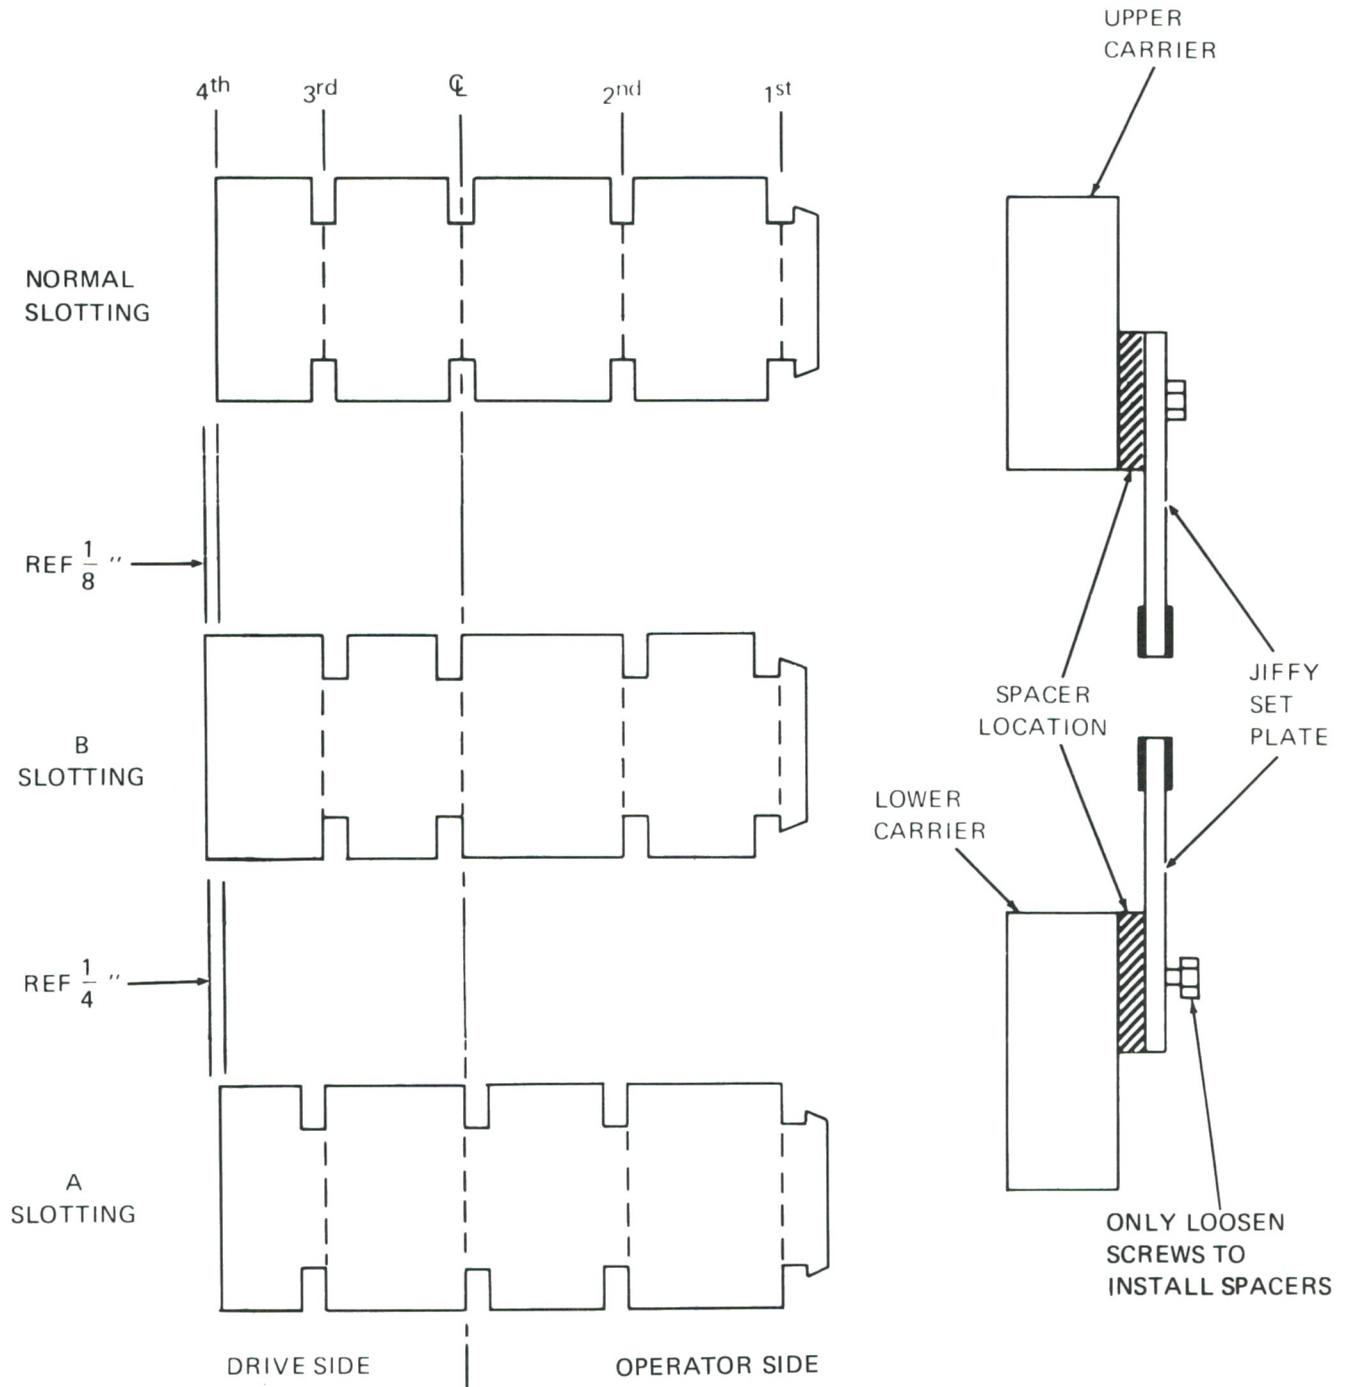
OFF-SET SLOTTING GUIDE
